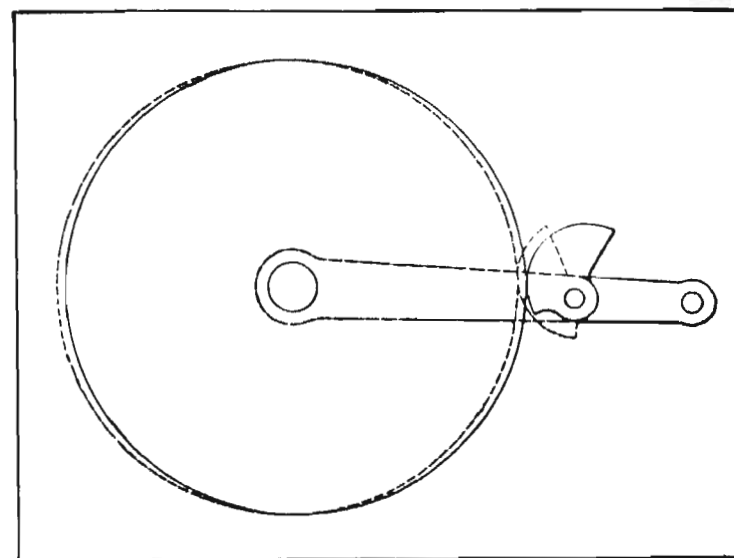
Friction Ratchet Consisting of a Disk, Segment, and Lever
